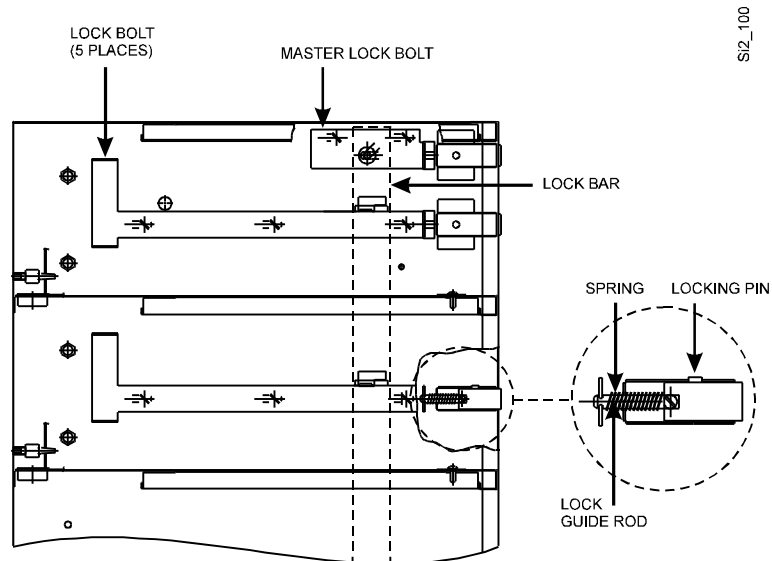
DM (CDM and MDM) Door Lock And Locking Mechanism
